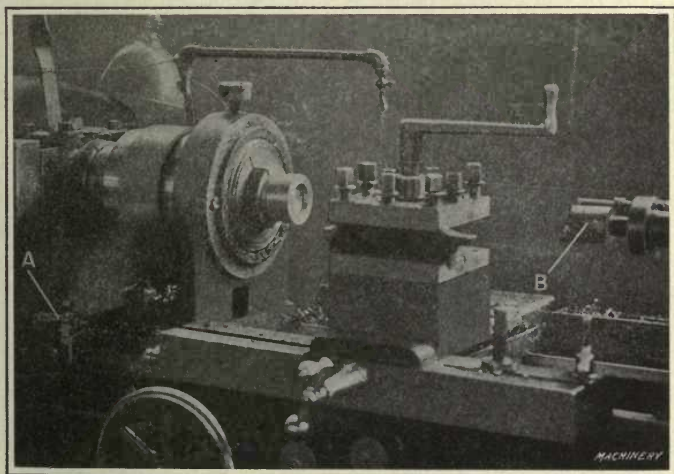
Facing-off Base End and machining Gas Plug Seat
